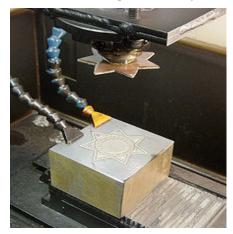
Master at top, badge die workpiece at bottom, oil jets at left (oil has been drained). Initial flat stamping will be "dapped" to give a curved surface. [8]
